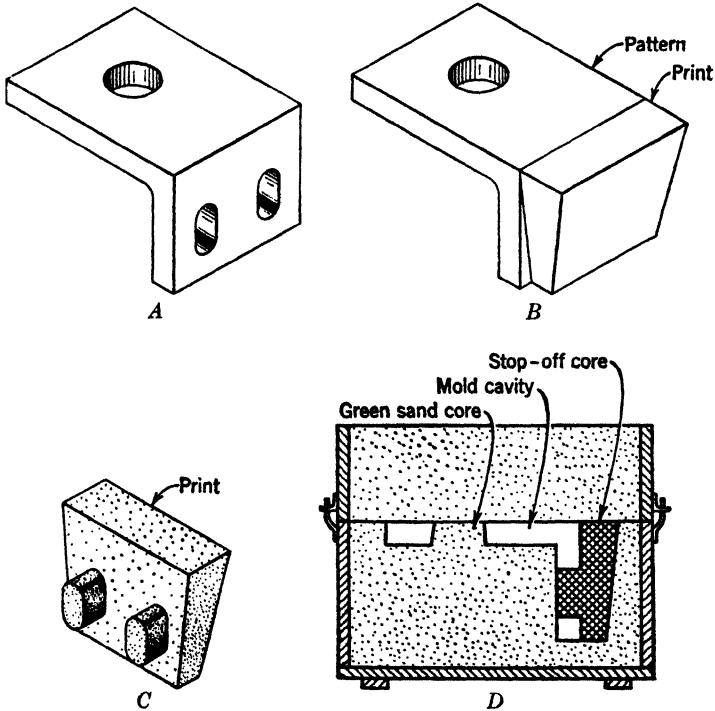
A. Casting requiring a stop-off core to make slotted holes. B. Pattern illustrating core print for stop-off core. C. Stop-off core. D. Mold section illustrating stop-off core.
